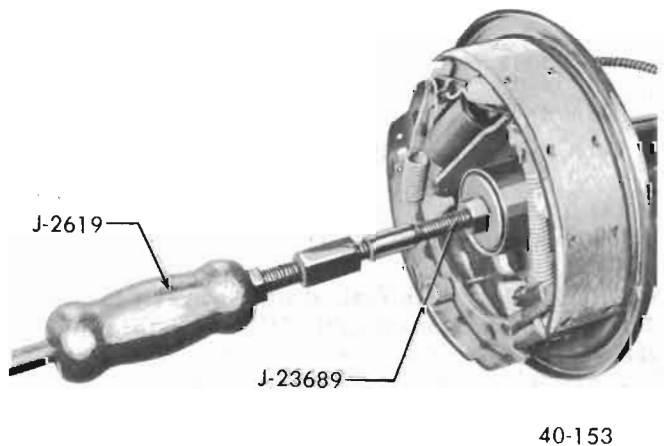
Axle Shaft Bearing and Seal Remover Installed
